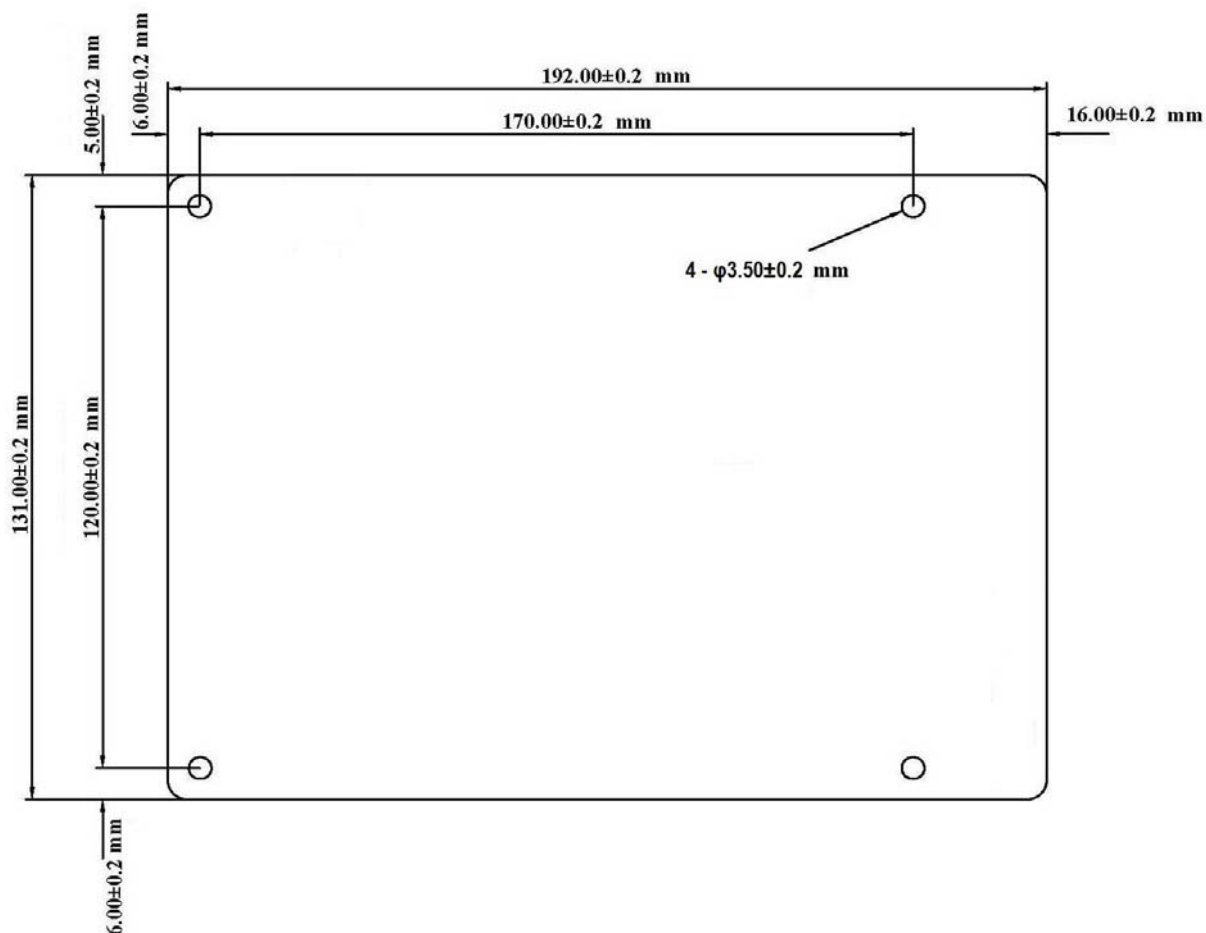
Power Supply Mounting Dimension (安装尺寸)
